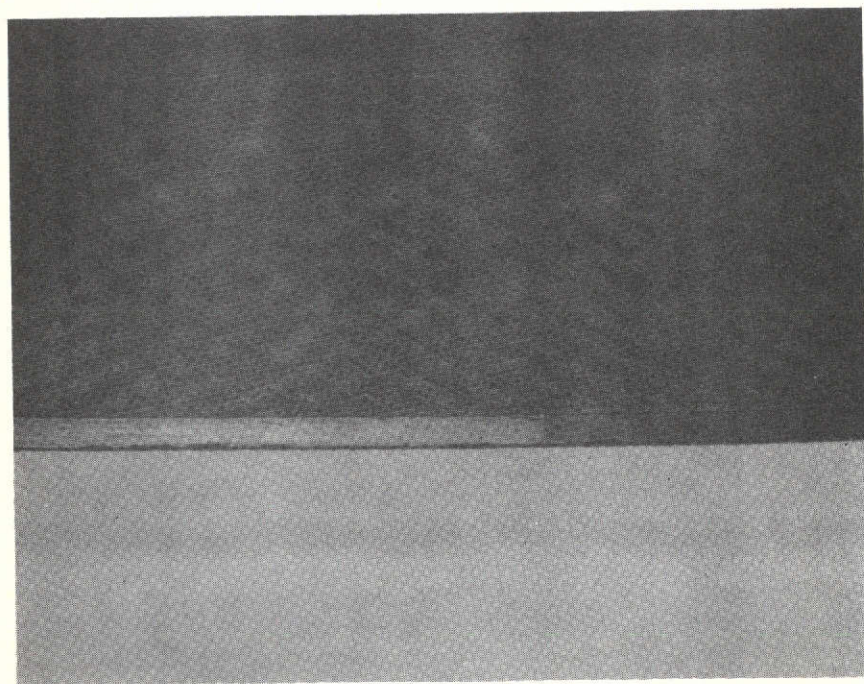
Type C Positive Plate - Coined and Die-Cut Edge
